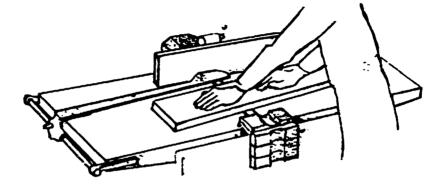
Both hands on the workpiece with fingers close together and well clear of the edges.
